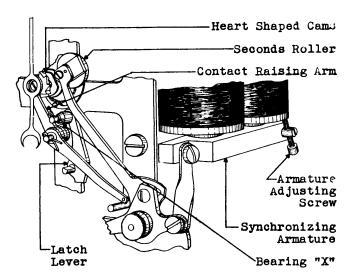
Position of Seconds Roller and Synchronizing Armature -Synchronizing Mechanism Operated
